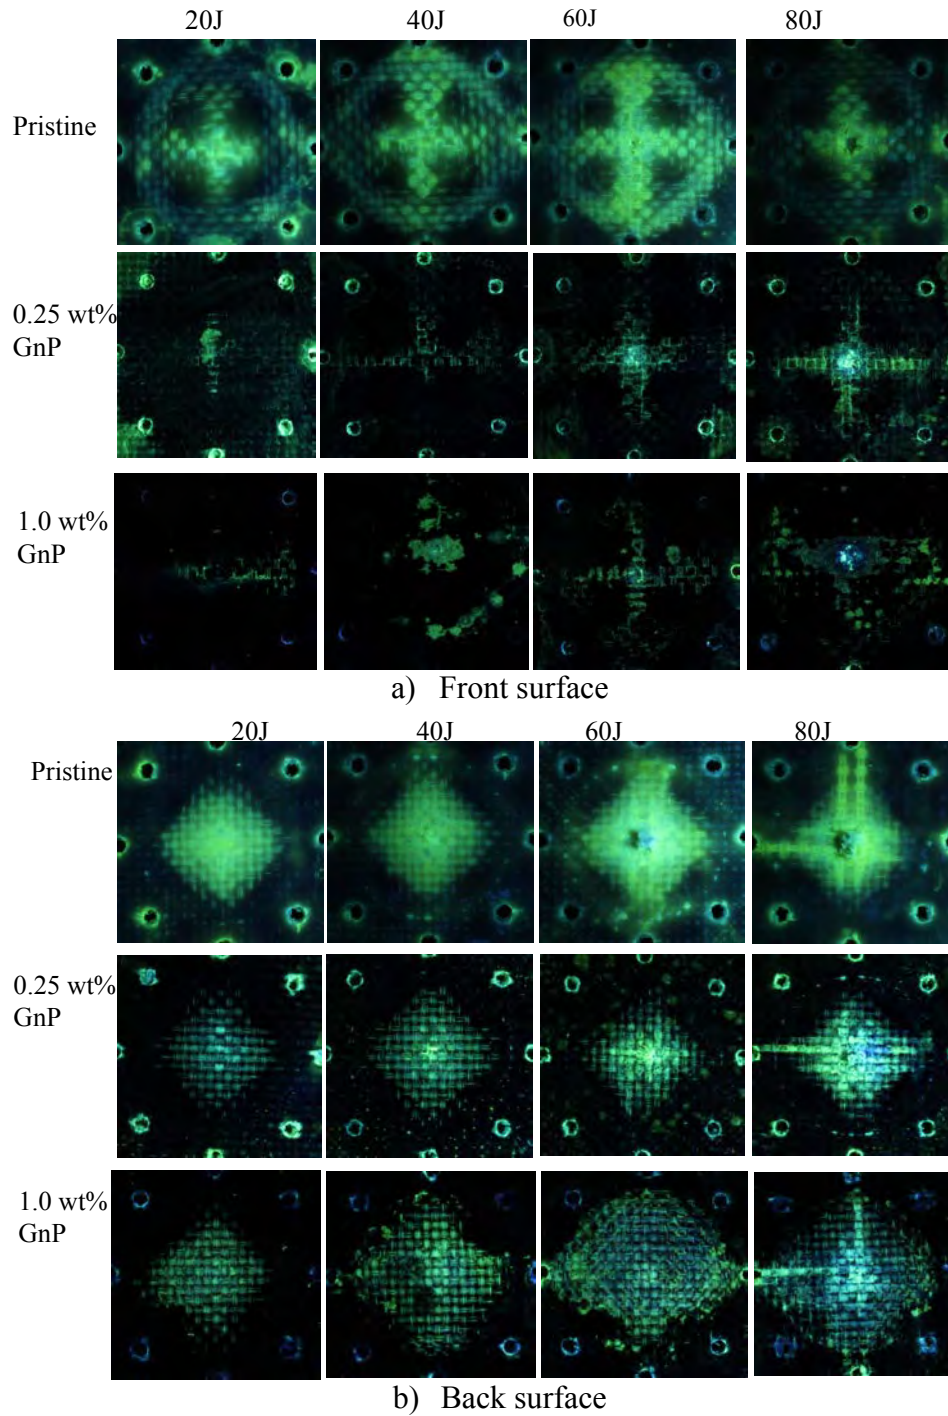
Dye-penetration inspection (DPI) images of impacted a) and back b) surfaces
